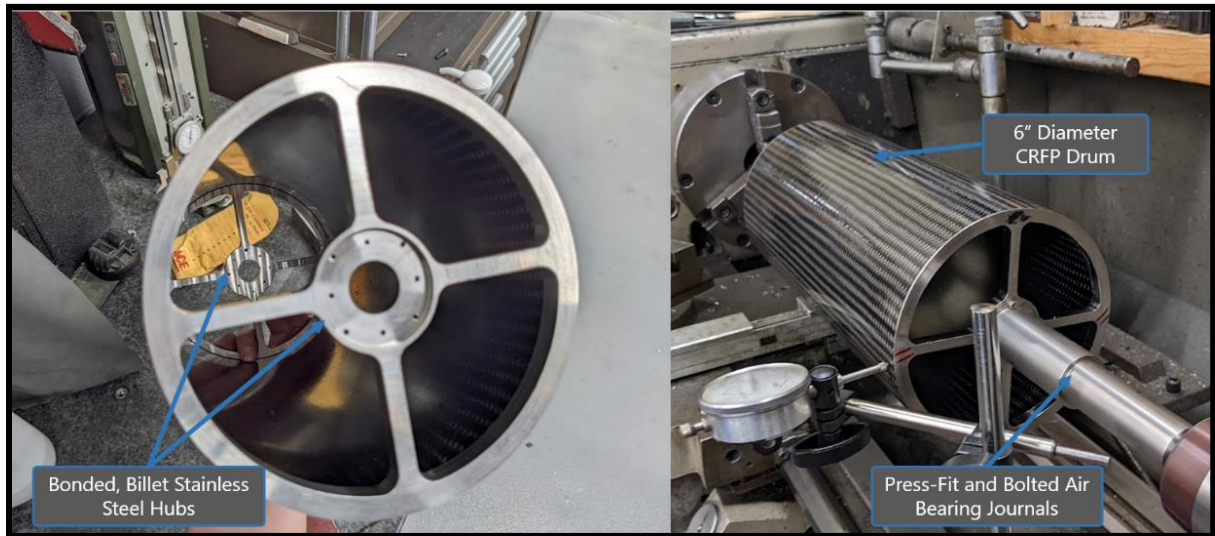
Upgraded idler roller fabrication showing bonding of stainless steel hubs and assembled roller before final precision surface grinding
